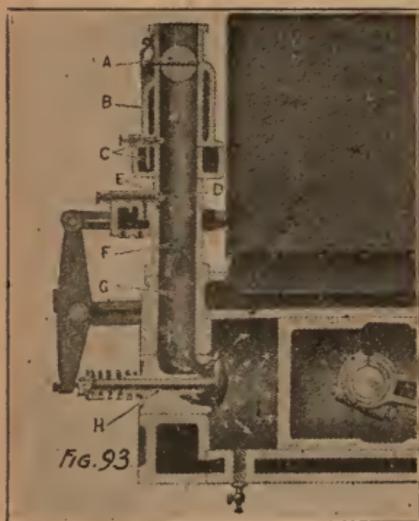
Cross section of patented Mogul mixer and cylinder, showing adjustments.
